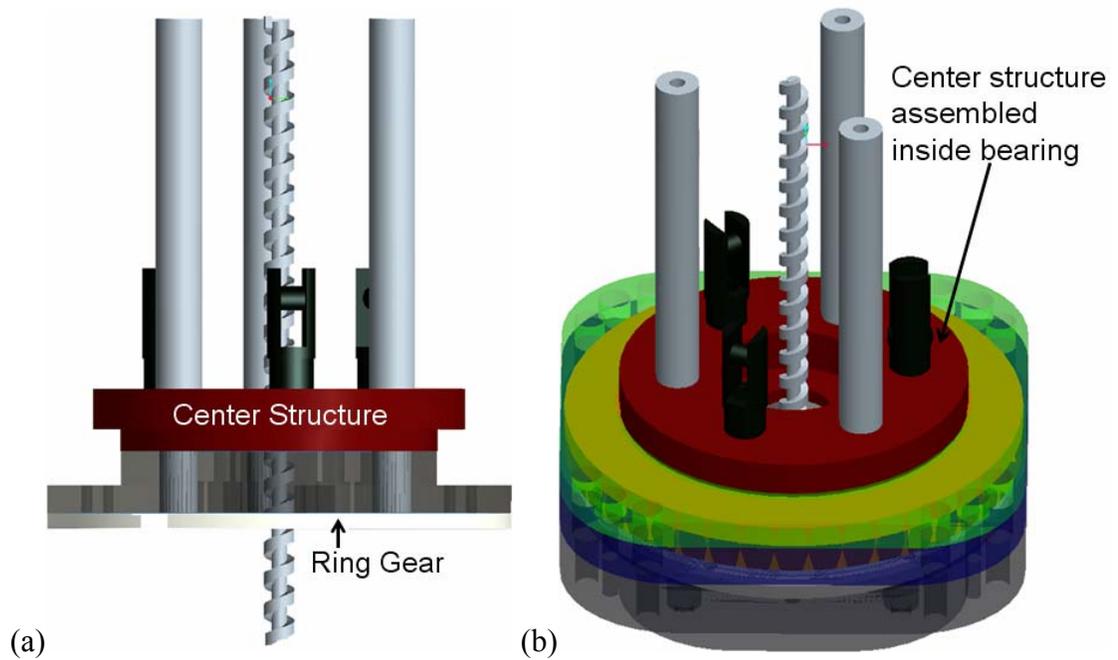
Center structure that (a) rotates with the ring gear and (b) located inside large bearing.
